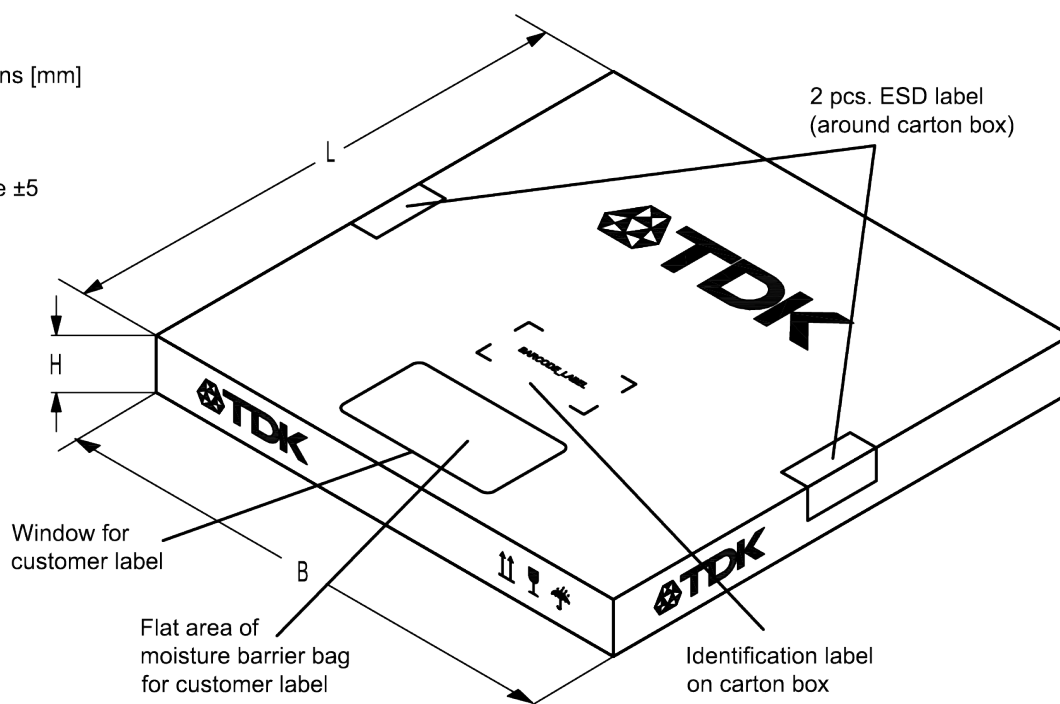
Drawing of folding box for reel with diameter of 180 mm.
